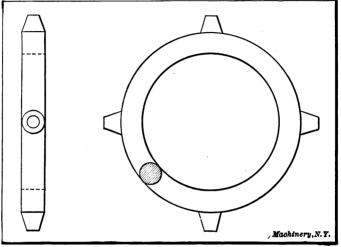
A Forging for which the Die Impression should be milled and typed before Turning
